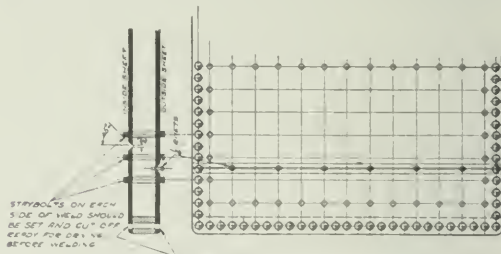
Method of Applying New Strips Around Bottom of Side Sheets, Throat Sheets and Back Head by Oxy-Acetylene Welding.
